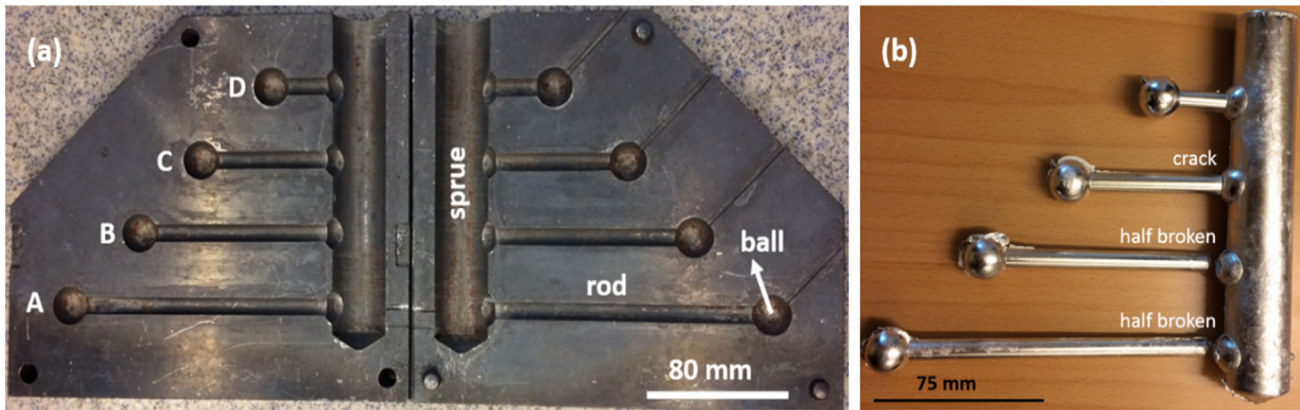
(a) Steel mold for constrained rod casting, (b) image of a sample cast with the CRC mold showing cracks.
